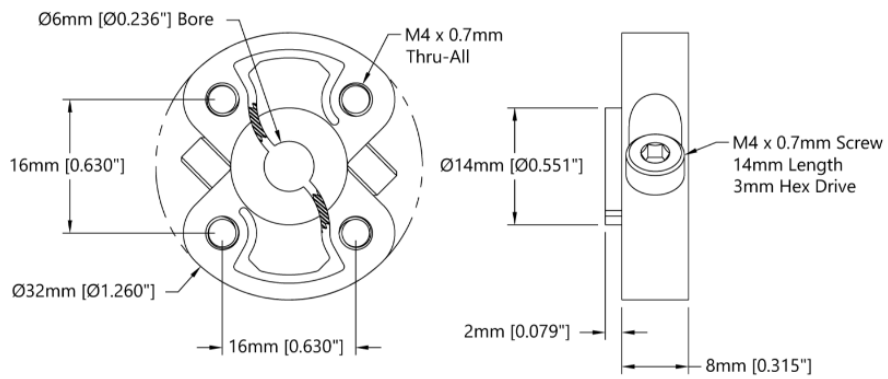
0.24 in. Round bore sonic hub drawing (in.). [4]
